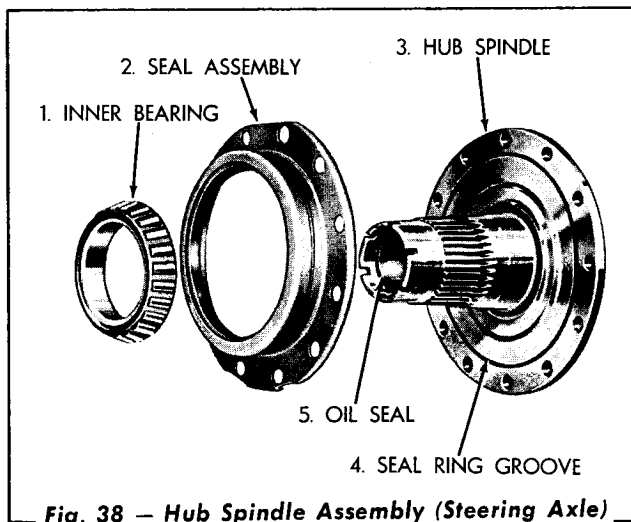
Hub Spindle Assembly (Steering Axle)
